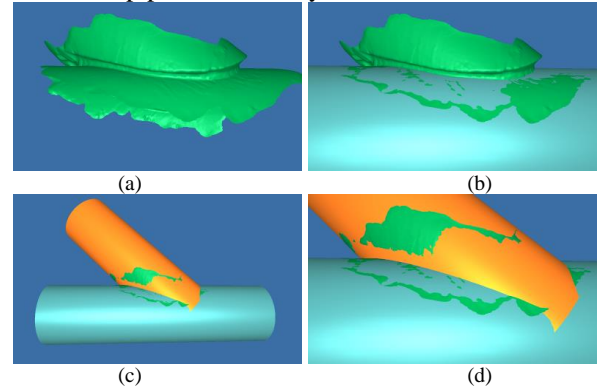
Major pipe and branch pipe fitting for the Y-joint: (a) reconstruct the surface; (b) fit the first cylinder; (c) fit the second cylinder; and (d) form the Y-joint.
